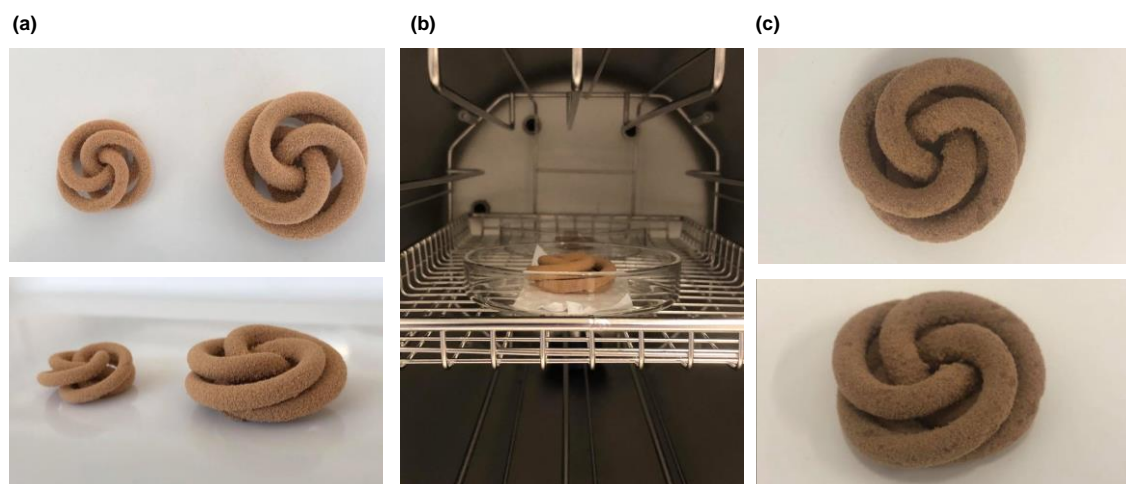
Example of 3DP cork parts with a complex geometry: (a) Form 4_Green parts; (b) cork parts in autoclave and (c) Form 4_Autoclave parts.
